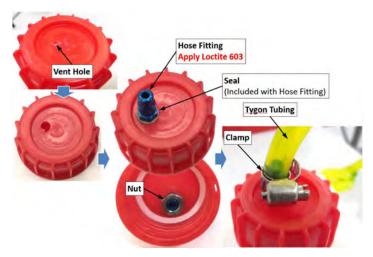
COOLANT OVERFLOW BOTTLE
